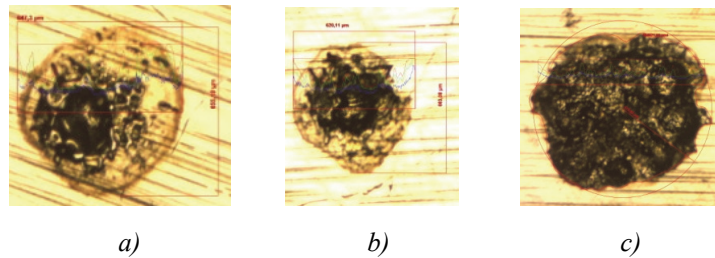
The crater machined in a) kerosene, b) emulsion, c) water
